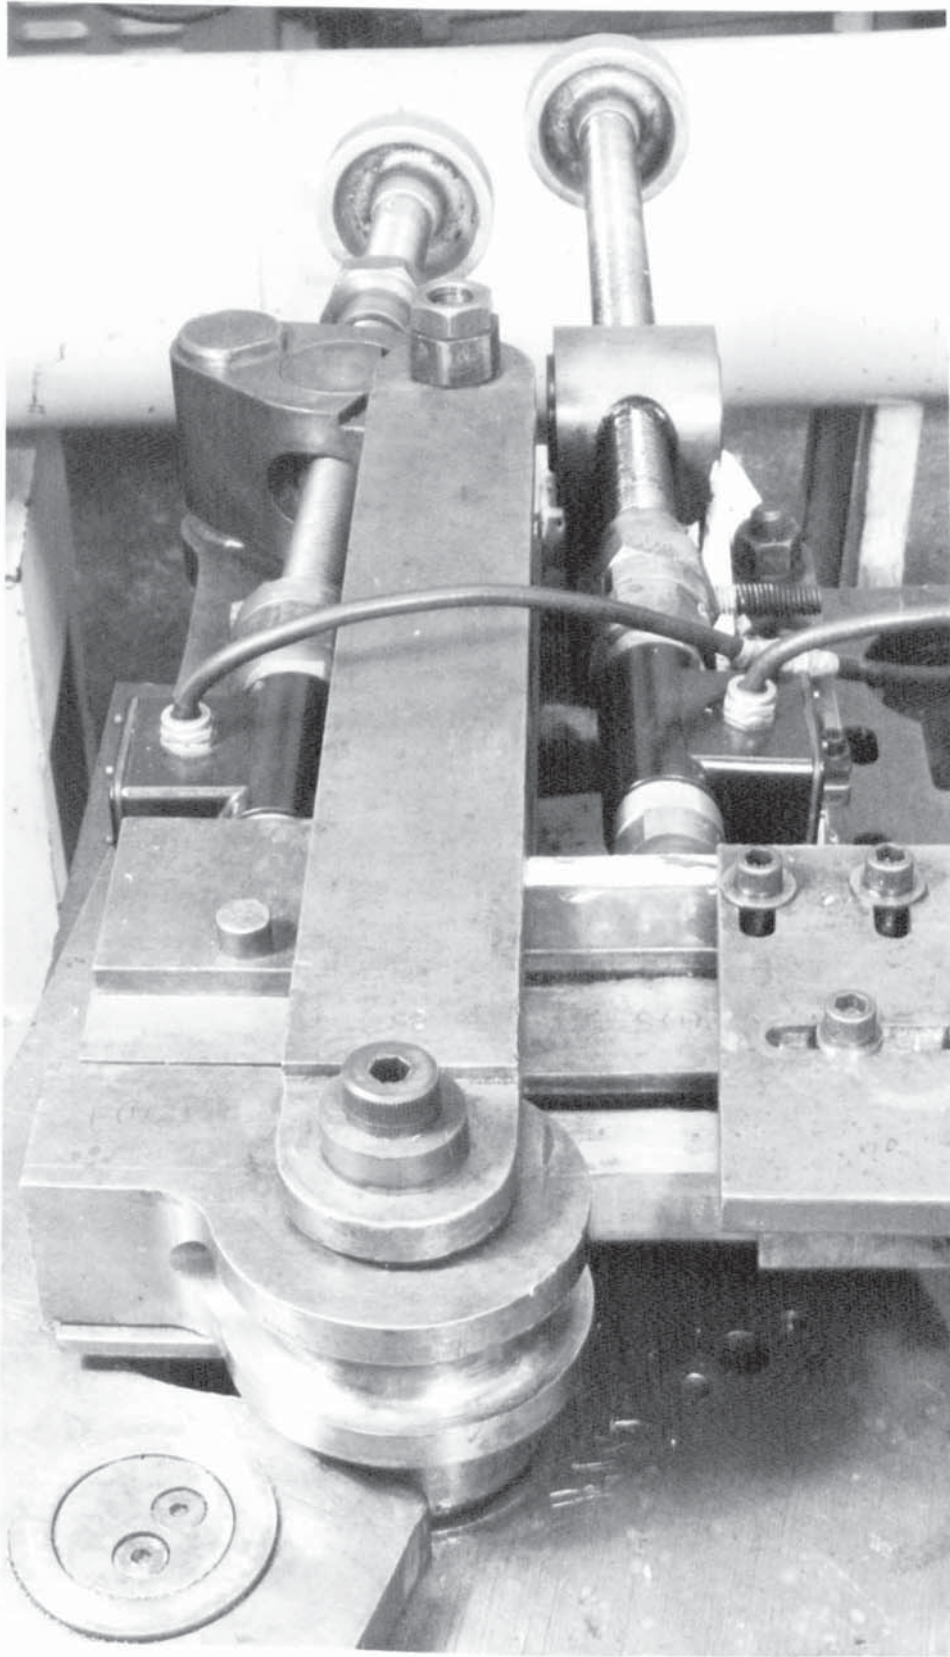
A close-up of the bending machine with the necessary arrangements
